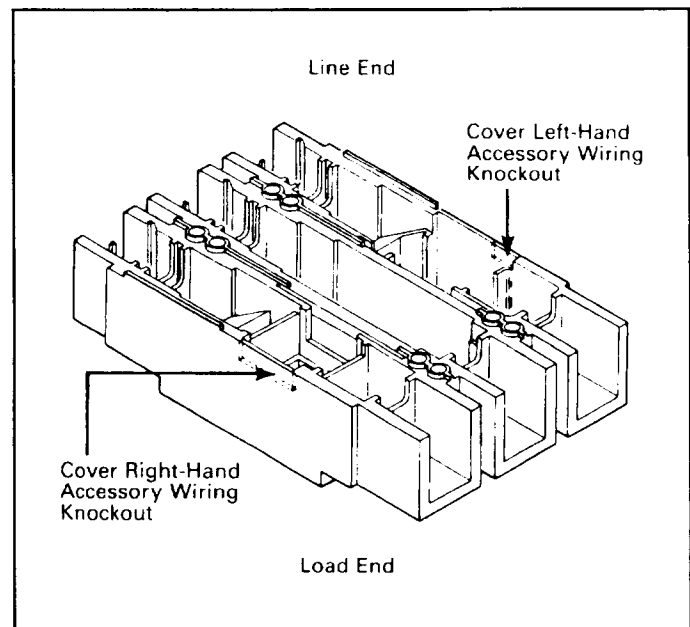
Location of Accessory Wiring Knockout in Cover
